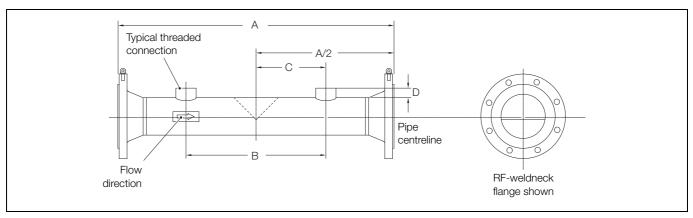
Model WMP with RFWN end flanges – sizes 200 to 600 mm (8 to 24 in.)
